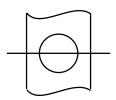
Acceptable Wire Stripper Blade Cavity Is Cylindrical and Forms a Complete Perimeter.
